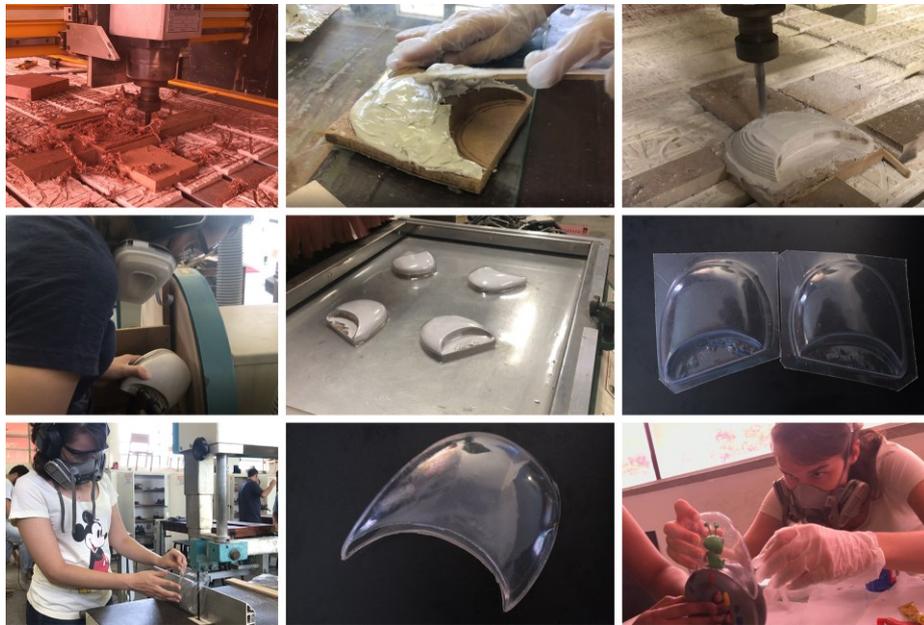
CNC machining and vacuum forming processes used to produce a transparent spaceship cover.
